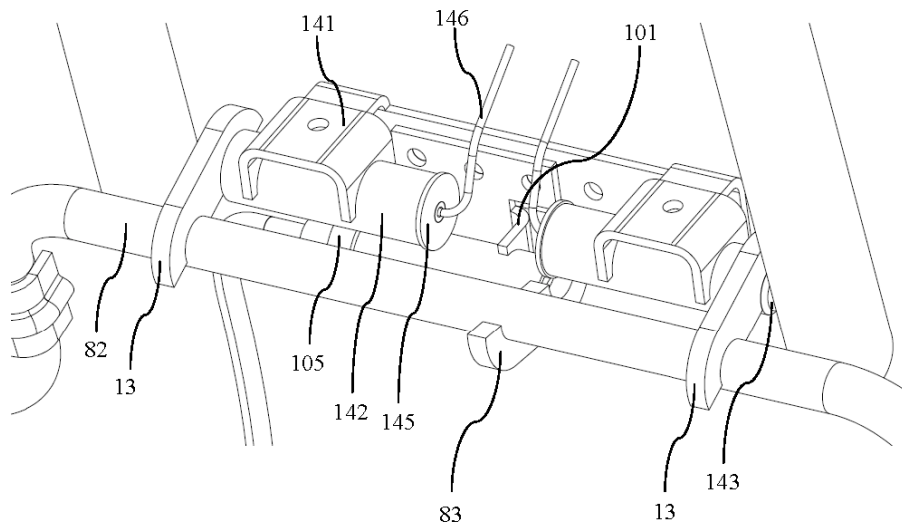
View wherein the alternative secondary lock locks the upper assembly at its frontmost position brought by the headrest springs
